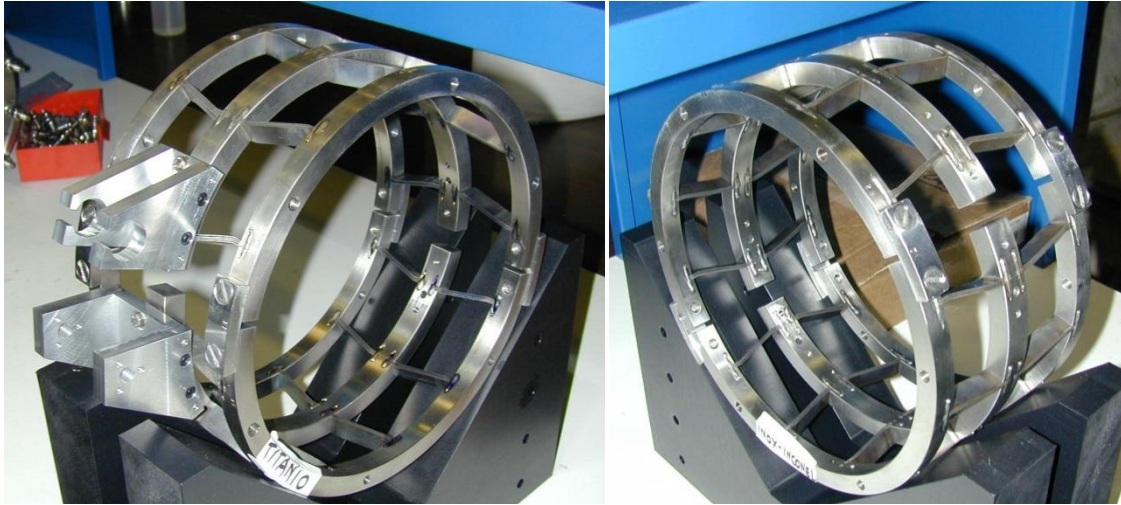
manufactured and assembled Blade Tuners with revised design, titanium model (Slim_Ti, left) and stainless steel model (Slim_SS, right)
